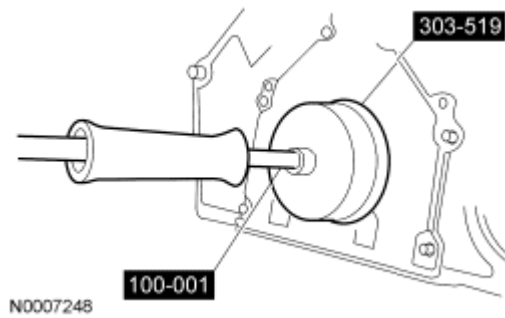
Removing Crankshaft Rear Seal Using Crankshaft Rear Oil Seal Remover And Slide Hammer
